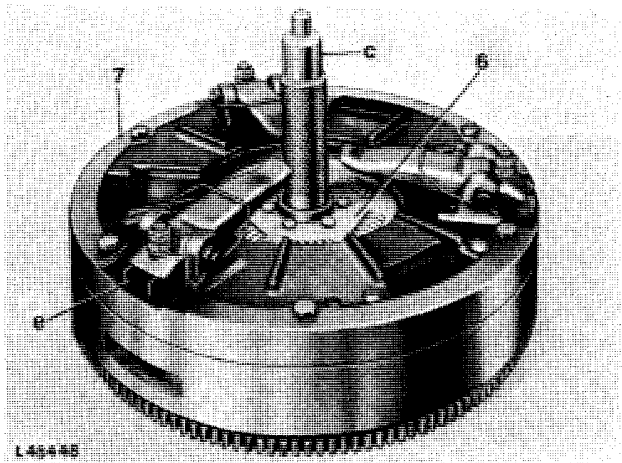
Driven Disks Aligned with Pilot Bearing of Flywheel
